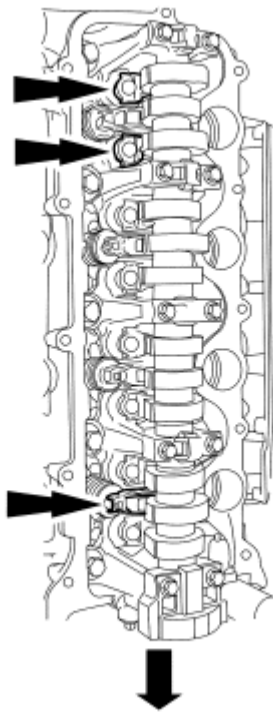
Identifying RH Cylinder Head Camshaft Roller Followers And Bolts
